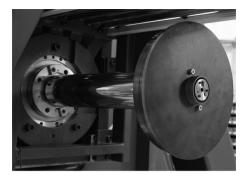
Photo of extended spindle of CNC machine with weights and laser beam battery source
